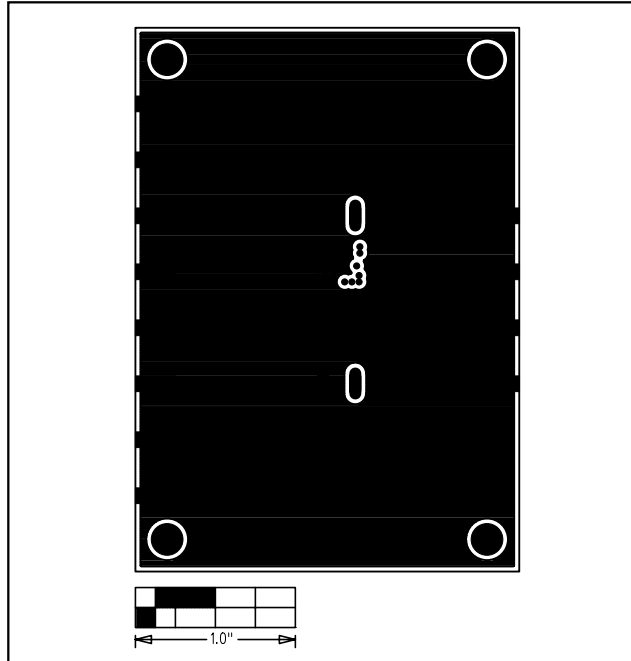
MAX9382 EV Kit PC Board Layout—Solder Side
